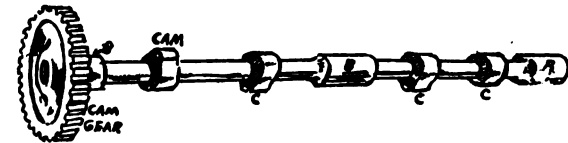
The cam shaft as used with a four cylinder T-head type cylinder. There are two shafts, an intake cam shaft and an exhaust cam shaft—one on each side of the cylinder as shown in fig. 4. There are four cams on each shaft. The nose of the cams are placed at different positions so that the valves will be raised at a certain time. C—are the cams. B—are the bearings for the cam shaft.
